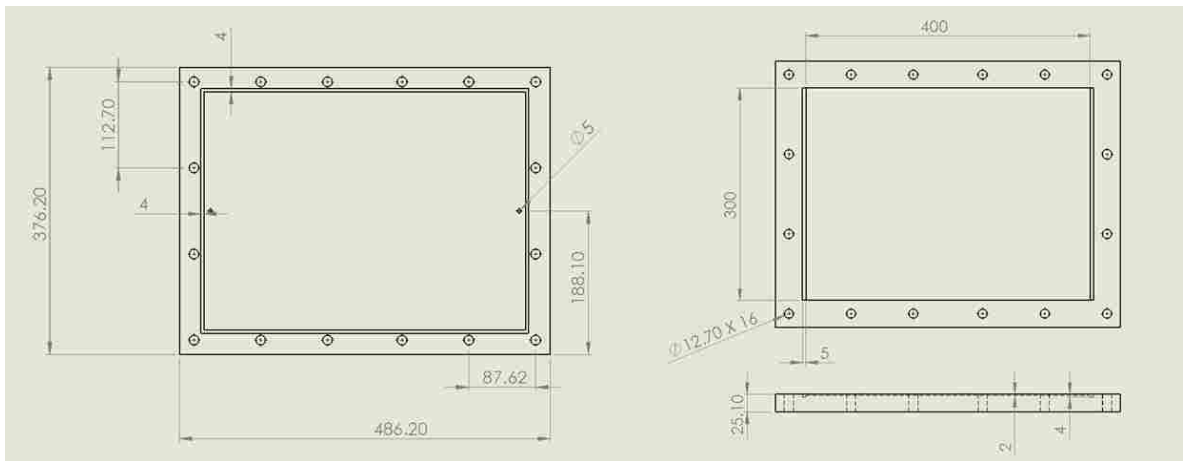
RTM Tooling Tool-side A (Left) and Tool-side B (Right)
